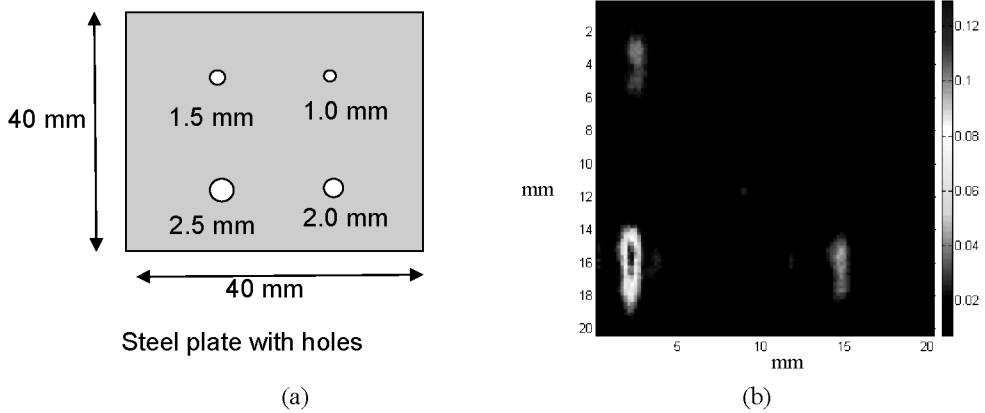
Drawing of steel plate with holes (a) and its millimeter wave through transmitted image (b); the x and y dimensions are in mm.
